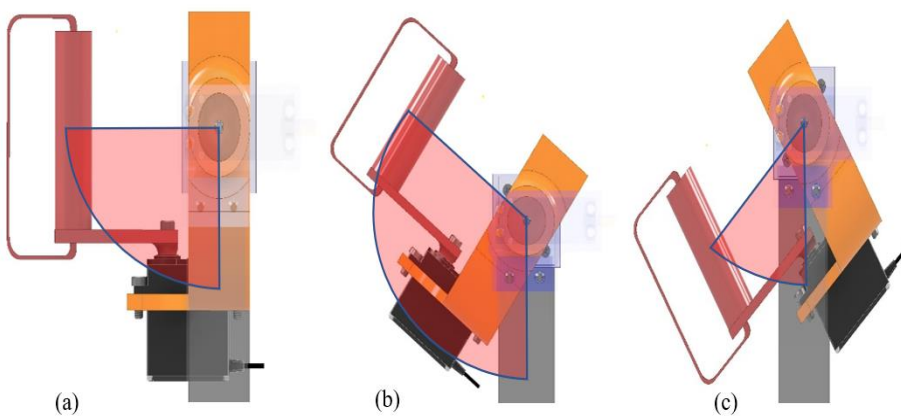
3D CAD assembly of the proposed system F/E ROM:
